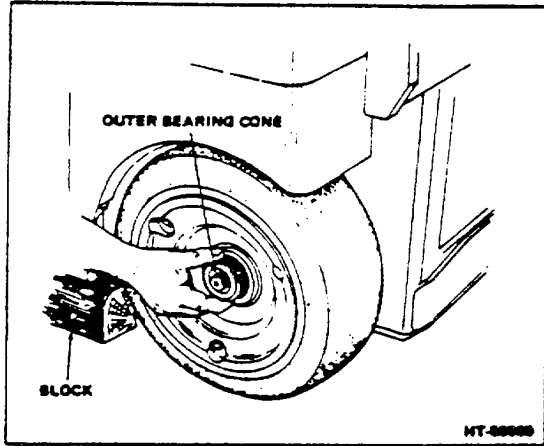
Removing Drive Wheel Outer Bearing Cone
